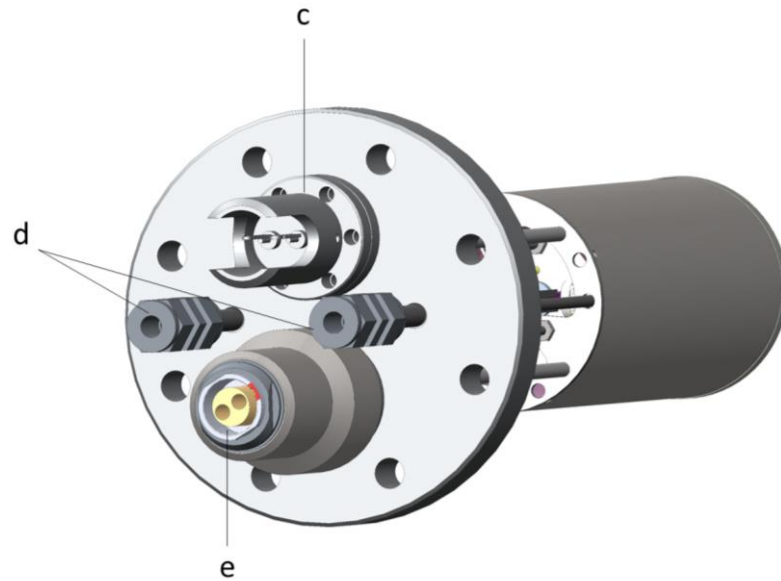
Fig. 3 3 Standard-temperature effusion cell (LTEC) base flange view. Parts labelled described in Table 3.
